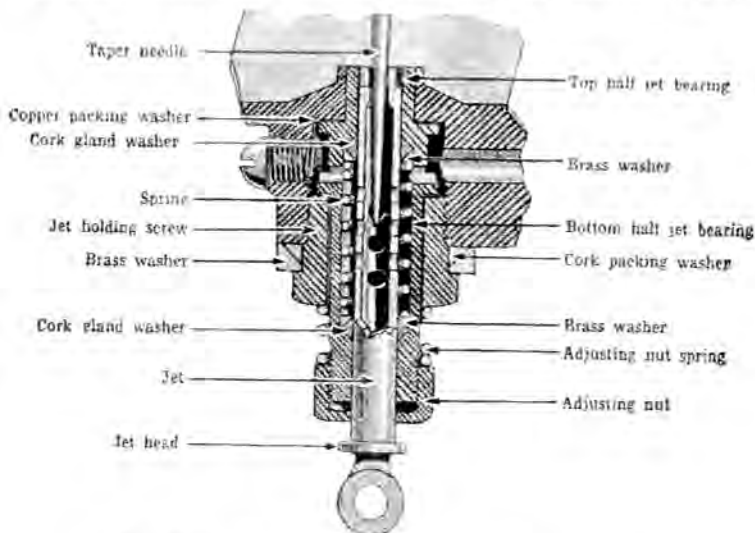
AN ENLARGED SECTION OF THE JET ASSEMBLY
